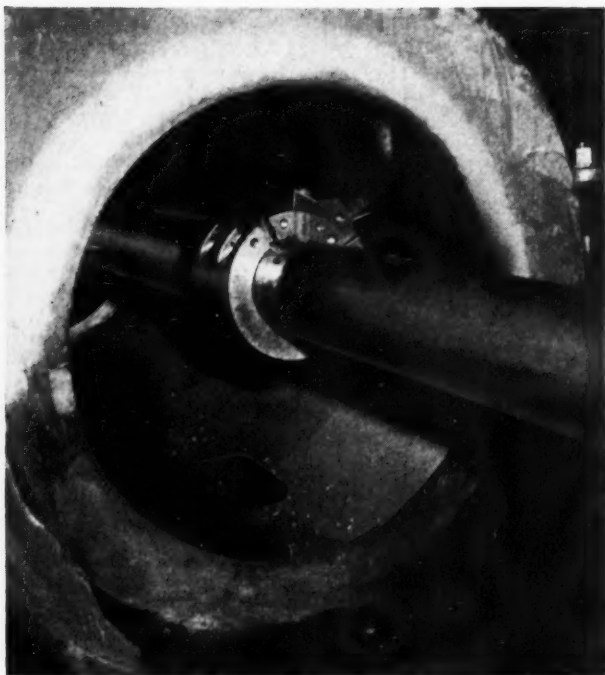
View of the Boring Head Employed in Finishing the Tapered Hole in Ship Rudders
